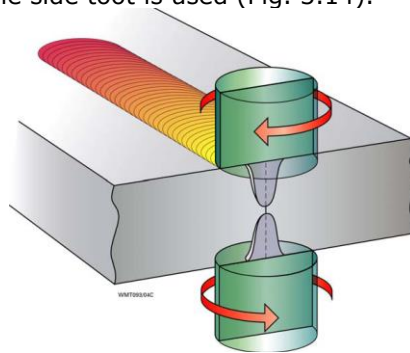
Simultaneous double-sided friction stir welding with contra-rotating tools
